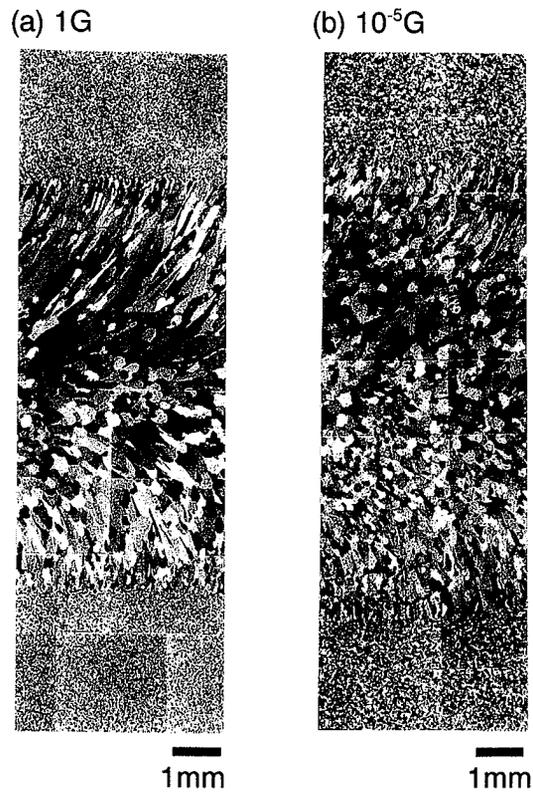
Longitudinal sections of butt welds formed in horizontal welding with helium shielding gas in both environments.
